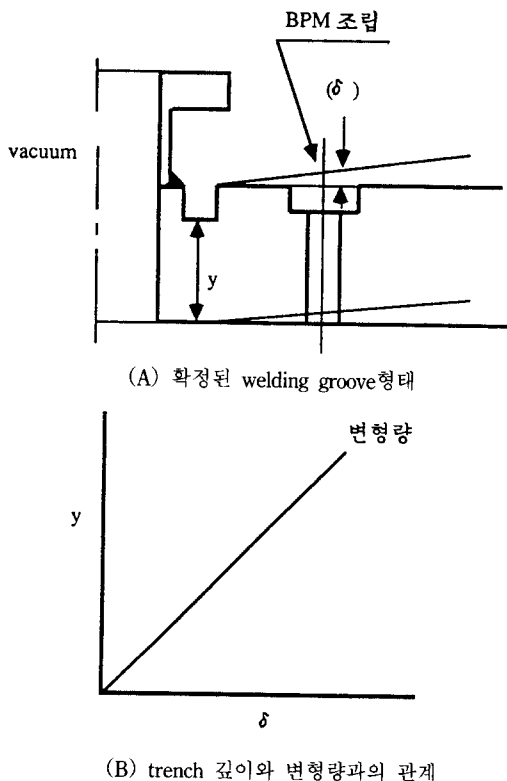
The dependance of the deformation on the shape of welding groove
